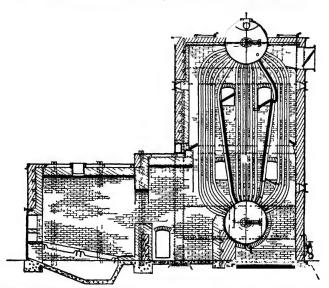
Casey-Hedges vertical water-tube boiler, equipped with a "hogged-wood" Dutch-oven furnace.
